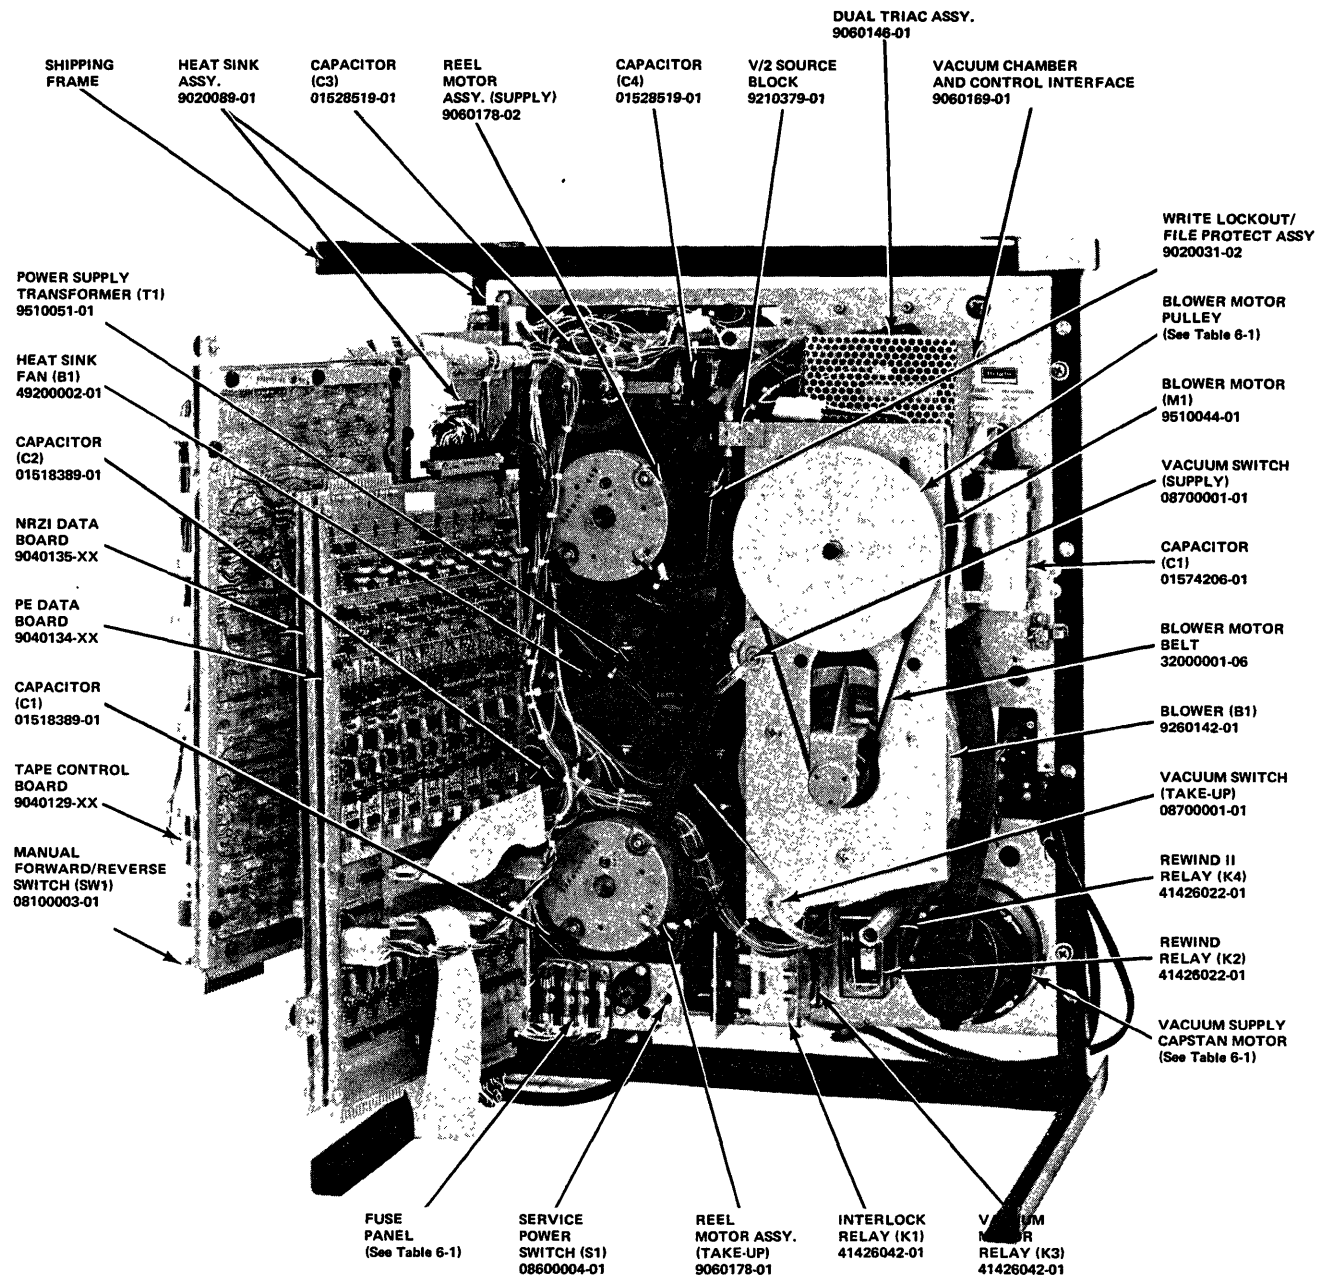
Model 2760 Tape Unit Mechanical Assembly
